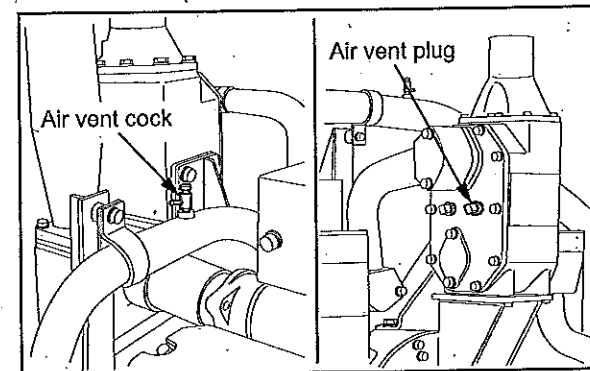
Air vent cock and plug (Air cooler cooling system)
